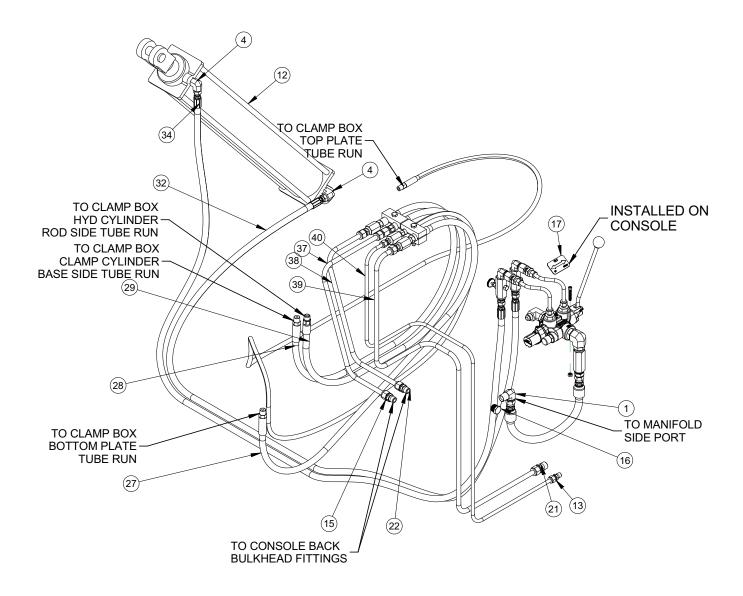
TILT MODEL KIT ASSEMBLY (P/N 91448)
